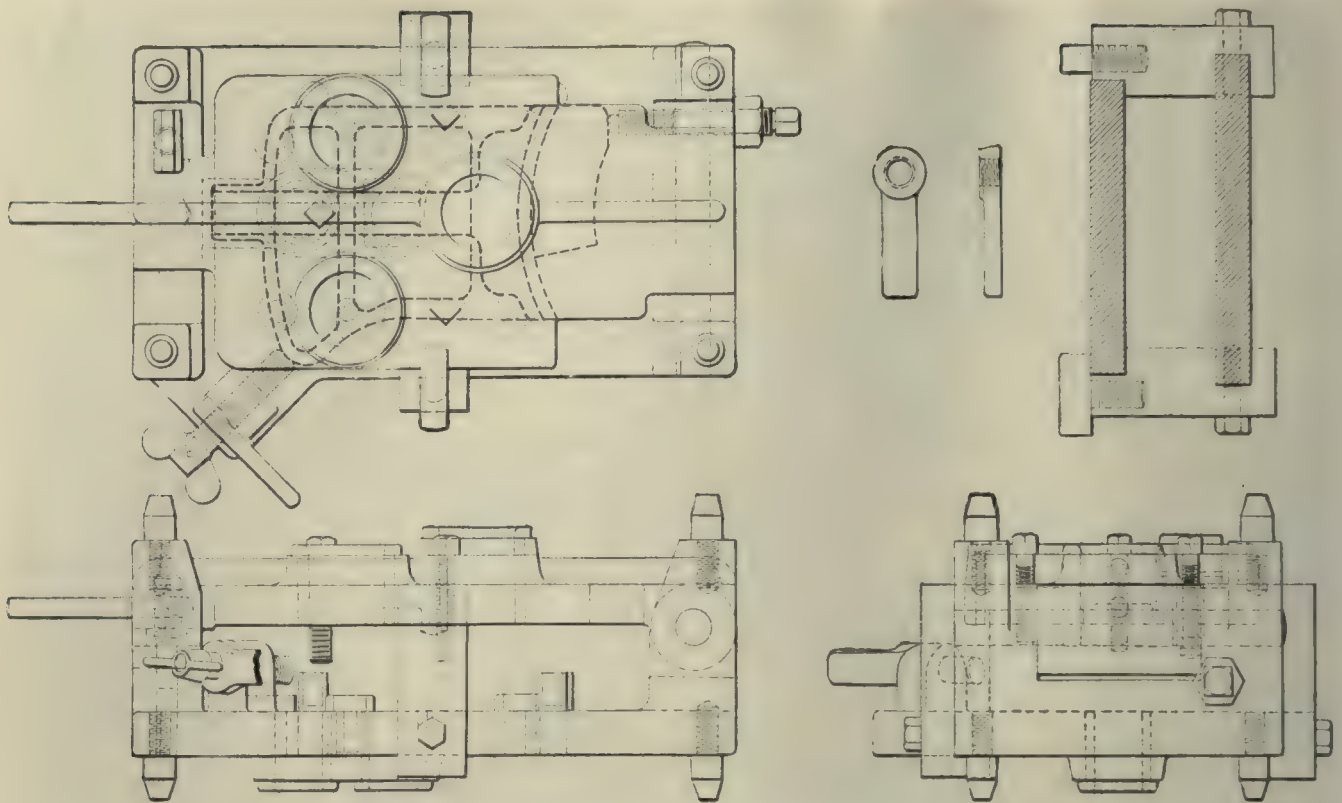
CONSTRUCTION OF HOLLOW-MILLING JIGS
